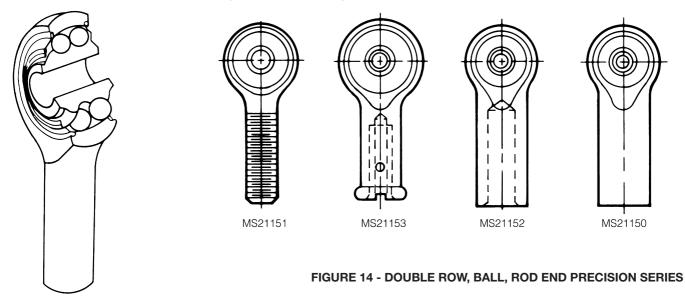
shows internal construction of a double row ball bearing rod end. Ball bearing rod ends are typically used for low load, low friction, dynamic applications. Configuration permits bearing misalignment to 10° in either direction. Inner rings and balls are made of 52100 steel with bodies made of 4130 steel or 8620 steel. Bearings are cadmium plated for corrosion protection and prepacked in grease. NMB ball bearing rod ends are approved for procurement to AS6039 and MS21150, MS21151, MS21152, and MS21153.
